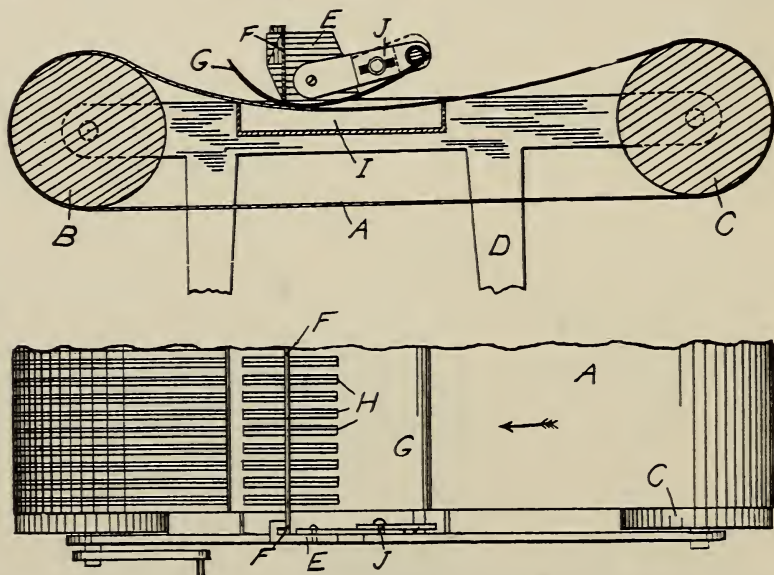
THE GUTHRIE STRIPING DEVICE.
